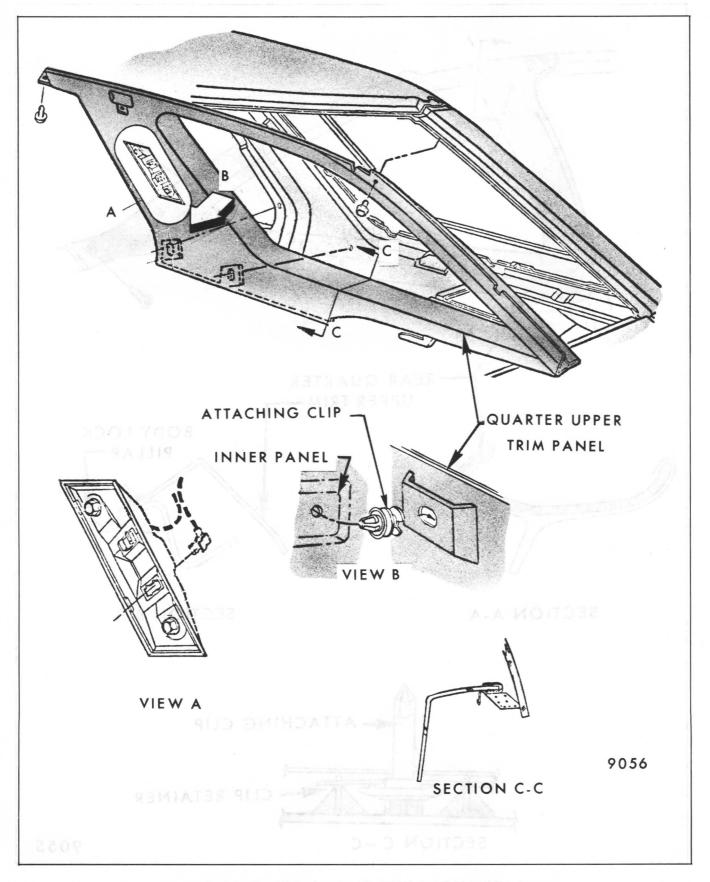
Quarter Upper Trim Attachment - "B" Style Shown, "E- 87" Similar
